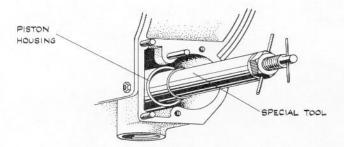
Withdrawing the piston housing showing extractor tool Churchill L182 in position
